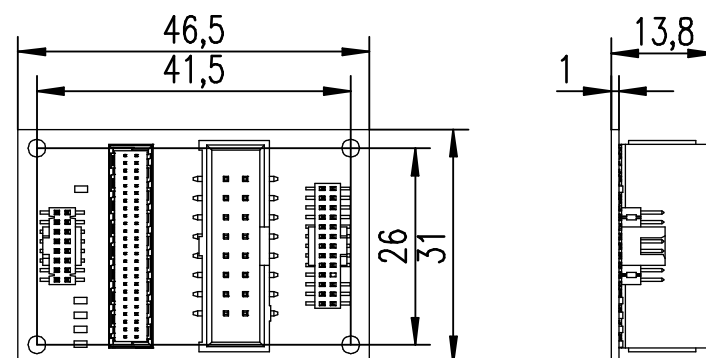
ETAF11 - Mechanical Dimensions and Component Placement
